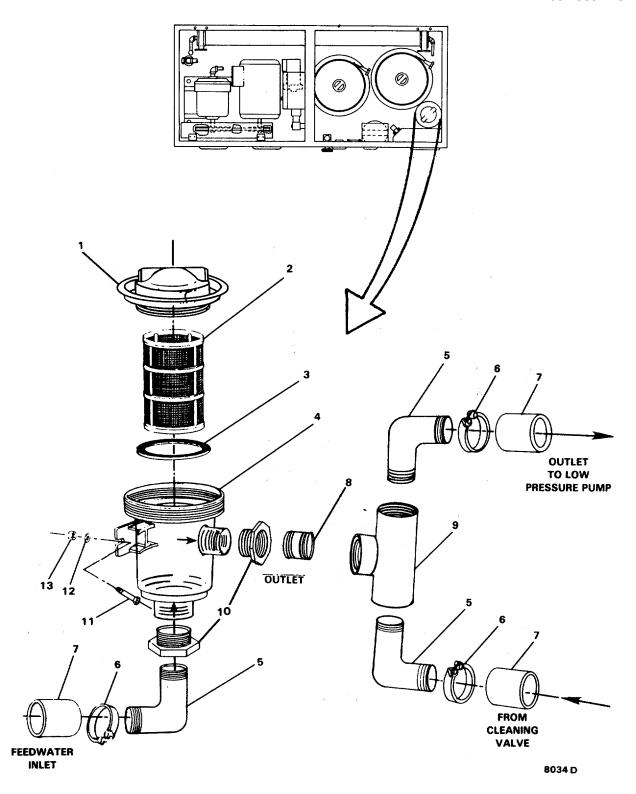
Service Sediment Strainer Assembly (Sheet 2 of 2).
